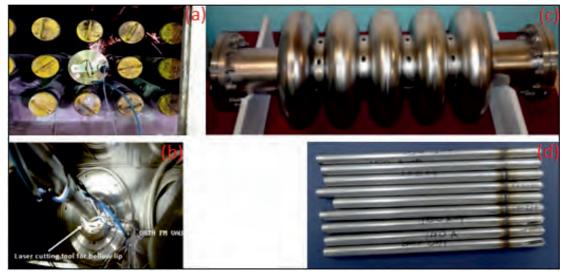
RRCAT developed Laser based technologies for departmental applications, (a) In situ laser cutting during EMCCR, (b) Bellow lip cutting of TAPS-4, (c) Laser welded 5 cell SCRF niobium cavity (d) Laser welded PFBR fuel pins
